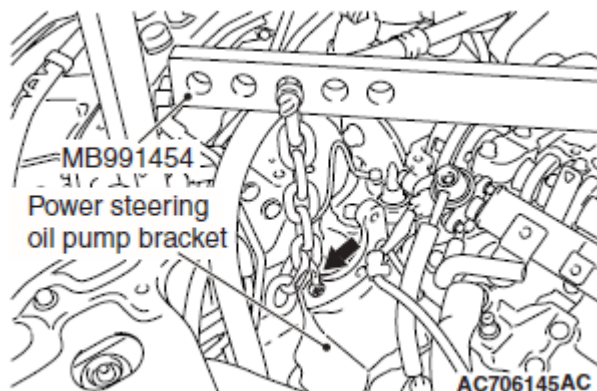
Identifying Power Steering Oil Pump Bracket To Special Tool MB991454
